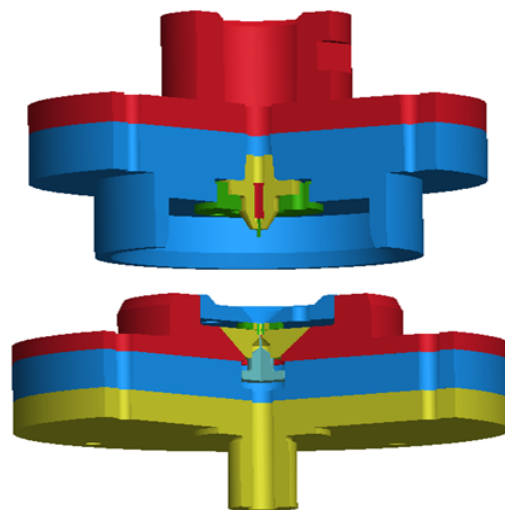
Illustration hybrid alignment approach. Alignment of the upper and lower die is ensured through relative alignment of the two tool holders. The holders are self-guiding through the conical surfaces [22].
